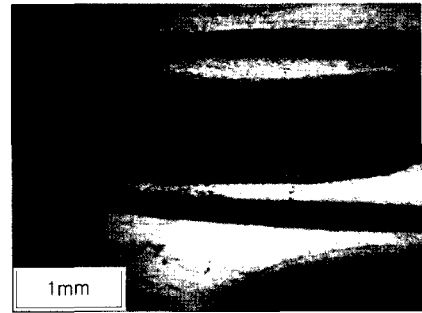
Weld cross section for Experiment 2-2(S)
